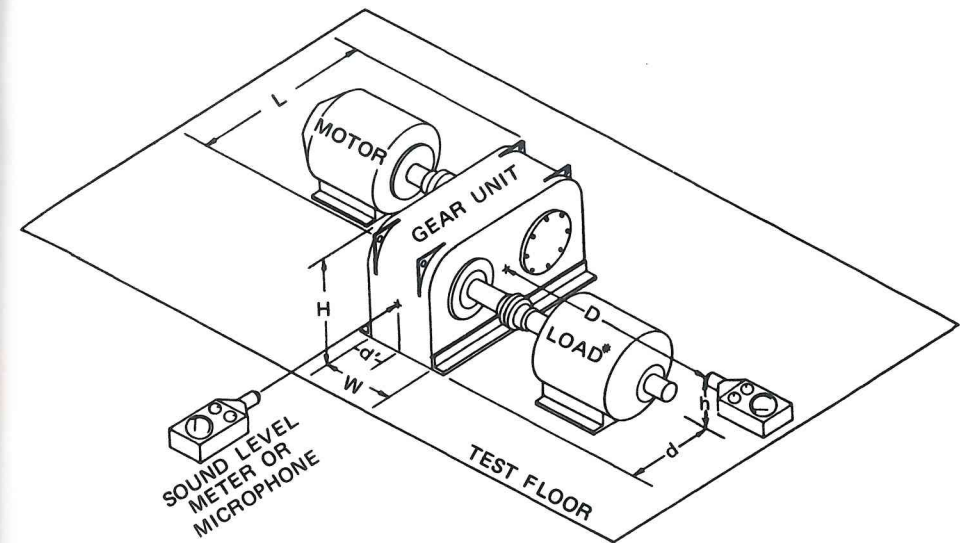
Sound test microphone position. Key: L, length of gear unit; H, height of gear unit; W, width of gear unit; D, distance of microphone perpendicular to unit, as specified in standard for size, h, height of microphone perpendicular to floor (H/2); d, distance of microphone from corner of unit (1/2) or (W/2). \*Note: Load is optional for factory testing. (From Ref. 3.)
